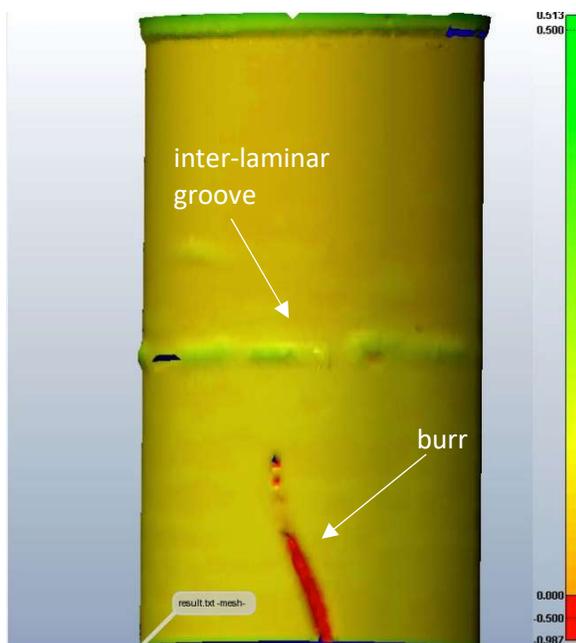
Inside surface of a rivet hole exhibiting a burr - an easy defect to instantly detect and identify with RivetInspect
